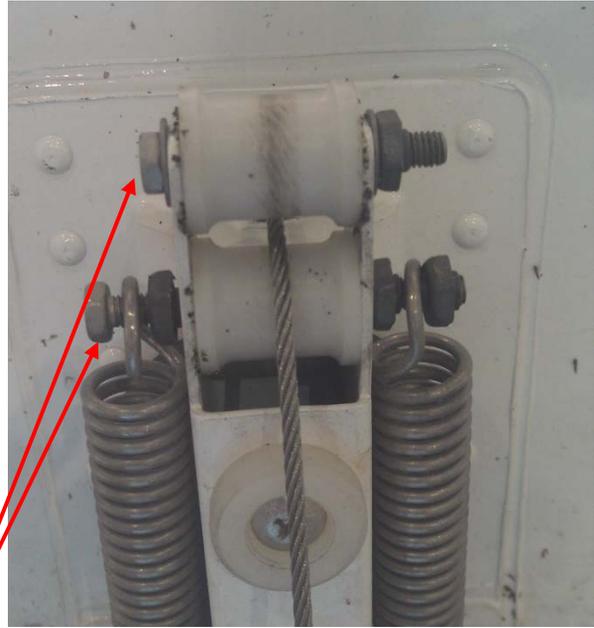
New bolts installed in upper and lower water retract cable pulleys.
